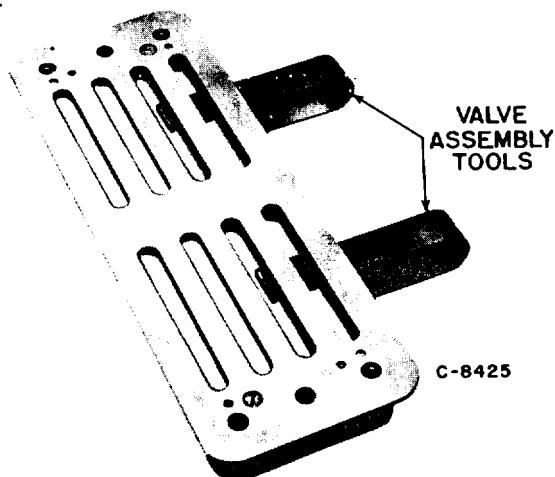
A-4—Use of assembly tool with eight port discharge valve.
